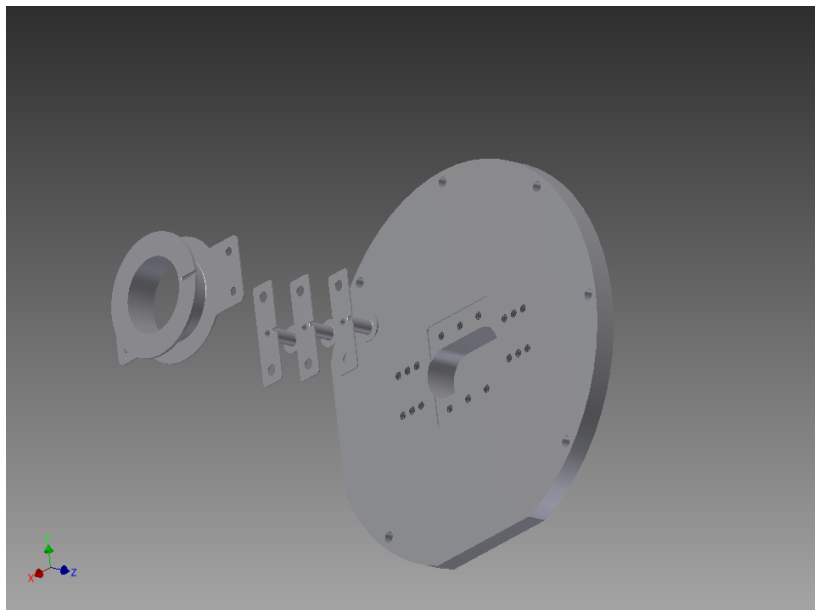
The illustrative CAD design of the mount with three small coil holders and a big coil holder.
